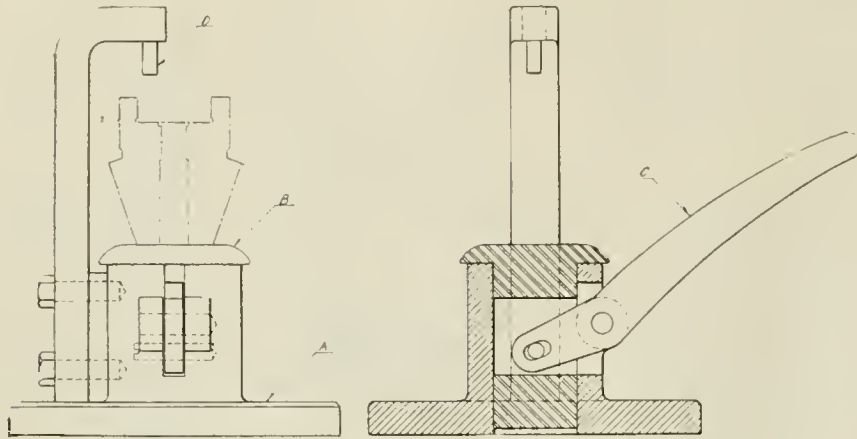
FIXTURE FOR COUNTERBORING DETENT HOLE.
